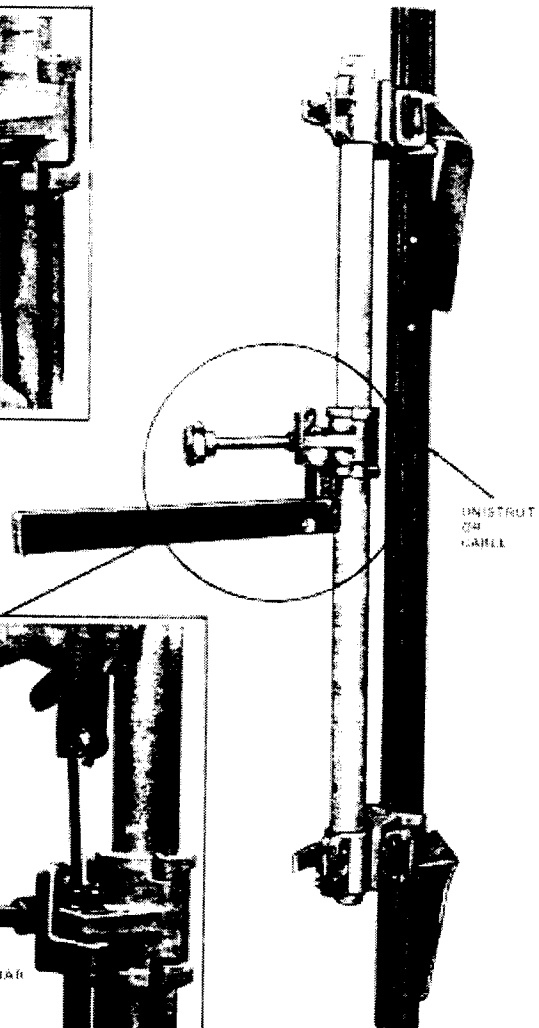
B Support Frame Mounted in Vertical Position on Frame
